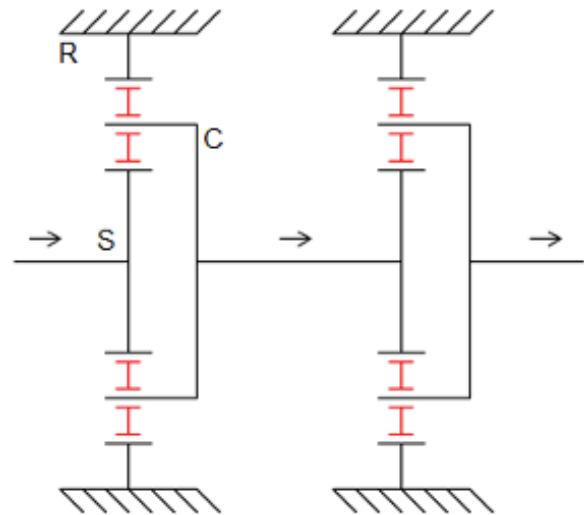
Planetary gearbox (R – ring, C – carrier, S – Sun)
